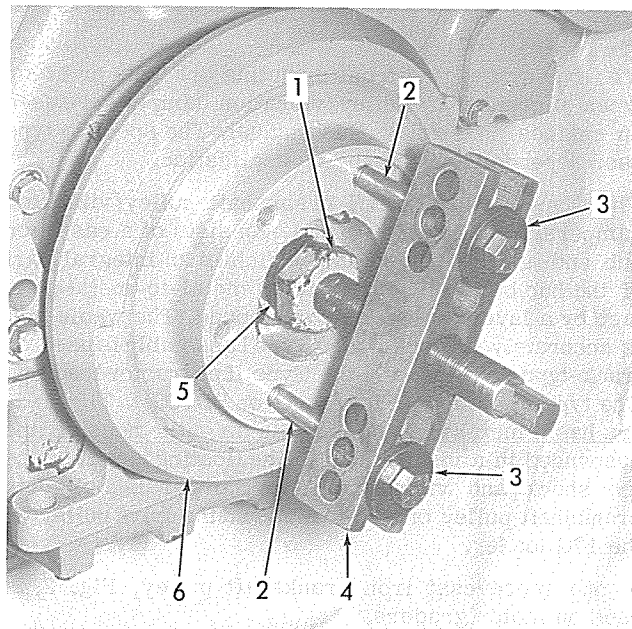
Removing Crankshaft Pulley/Vibration Damper (Crankshaft Pulley Removal Similar) (T-71007)
